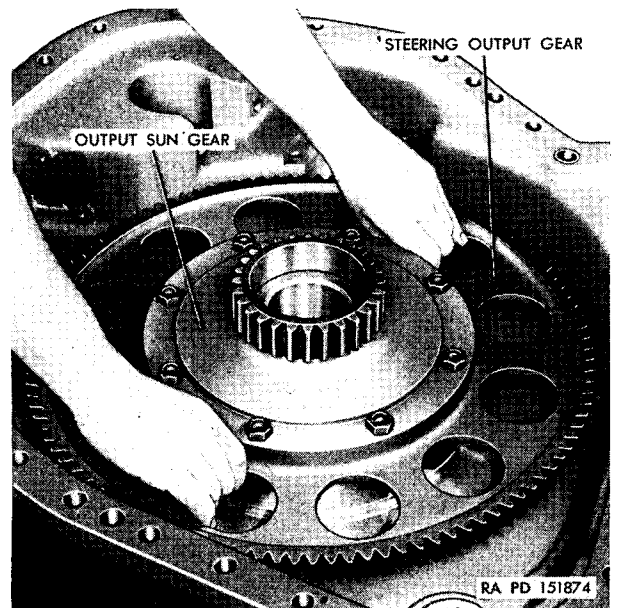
Removing or installing steering-output-gear and output sun gear assembly.
